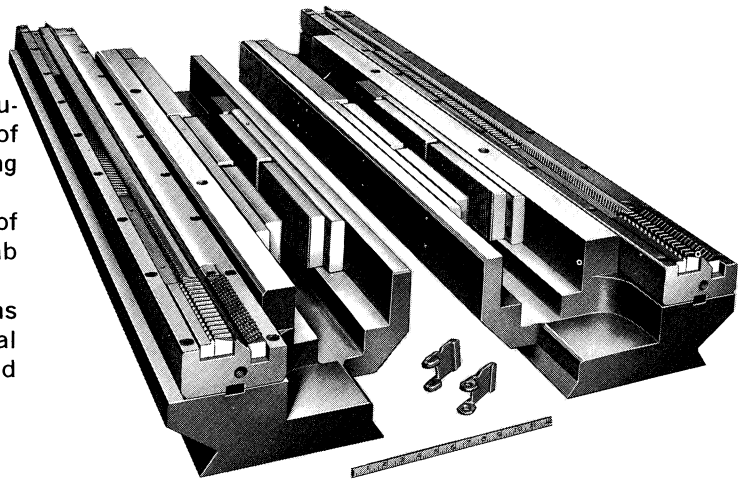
A Red Ring surface broach assembly for producing a bracket. The assembly includes a main holder, sub-holder and Naloy broach inserts.
